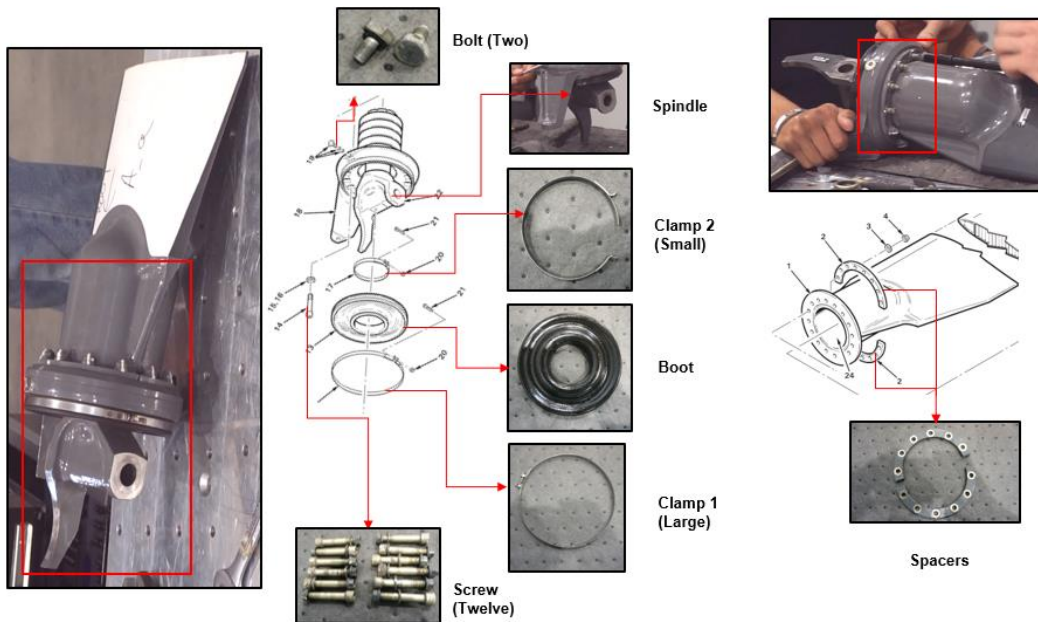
Part 27 Rotorcraft main rotor blade root region disassembly (Drawings from [32]).
